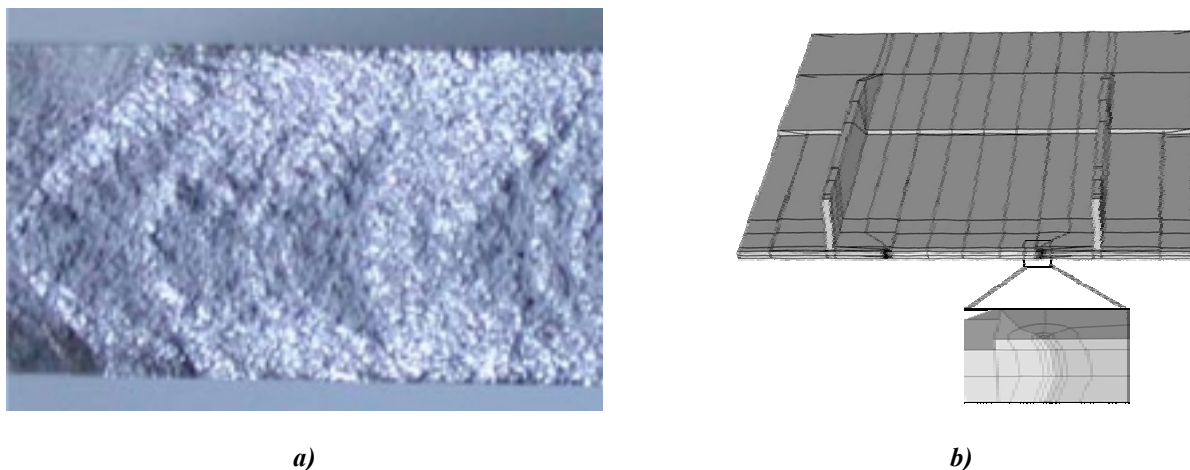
a) Fracture surface of the *2SP*-specimen and b) *2SP*-model with the crack front on a)
